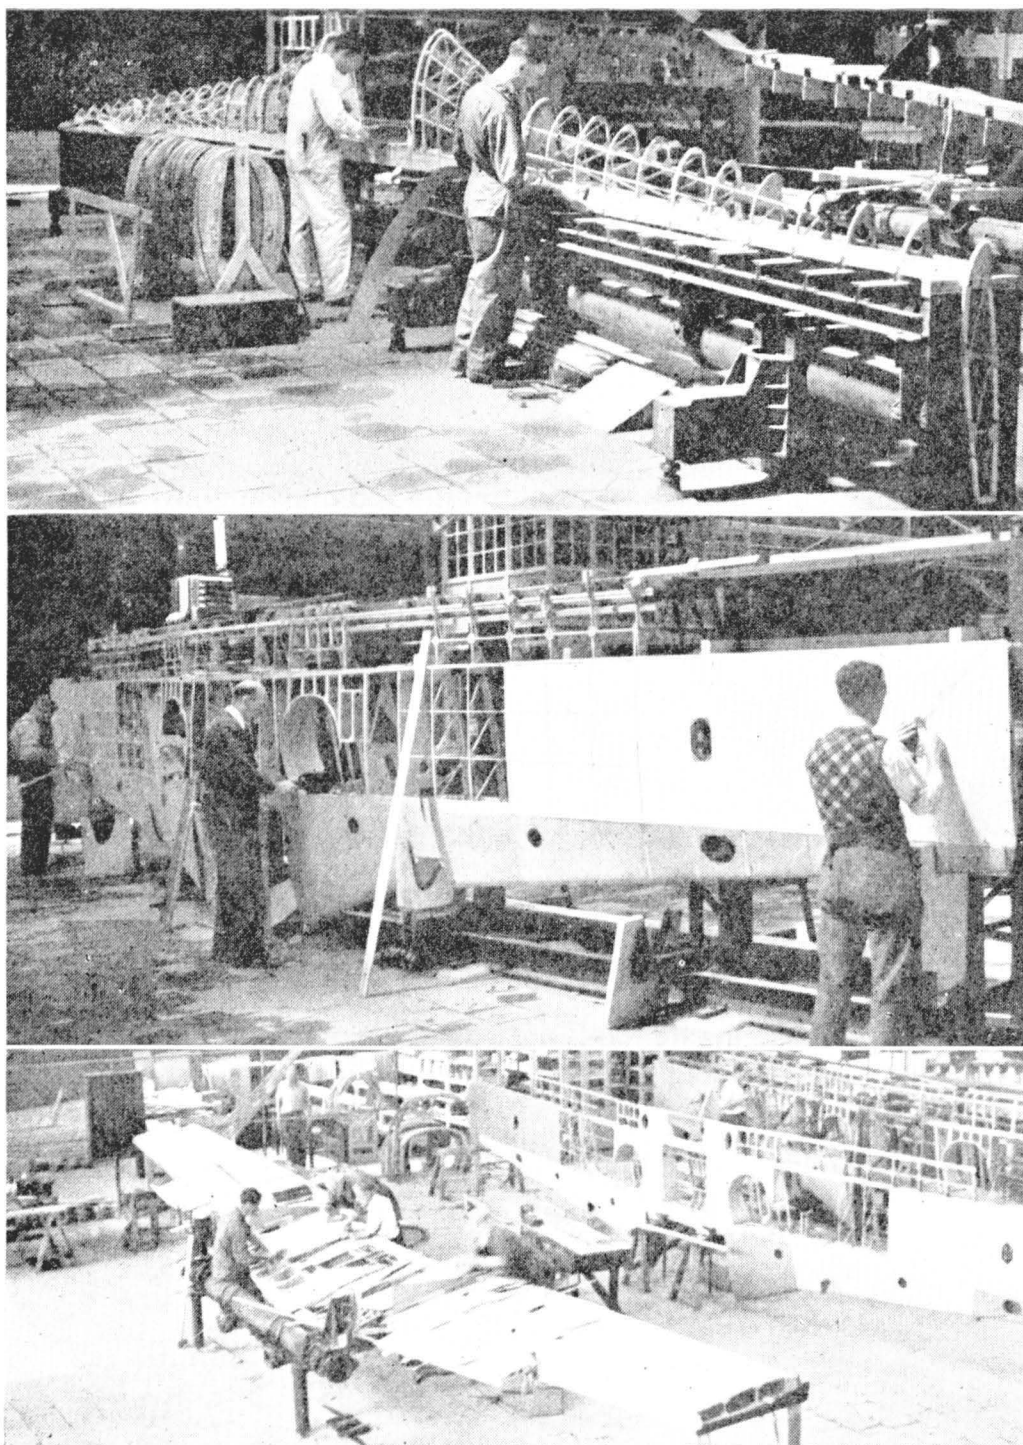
(top).—Henschel standard type of jig used for the assembly of the leading edge torsion section to the box spar. Note that the tip rib is a one-piece part
